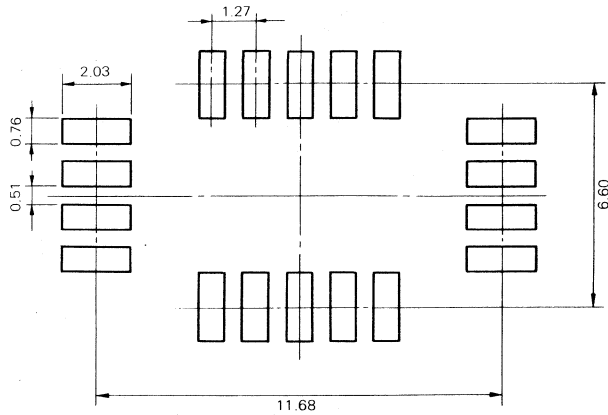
Recommended Mount Pad Dimension (Unit: mm)
